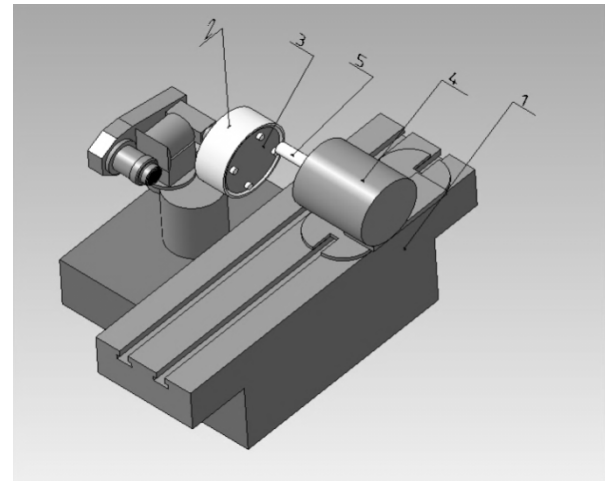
D-model of machine for producing powder by high-speed process (1 – frame; 2 – gathering case; 3 – grinding blade; 4 – feeding device; 5 – raw stock).
